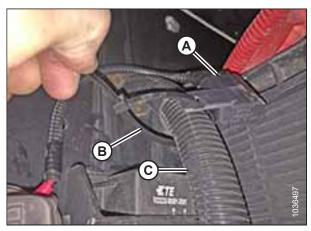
T74 Fuse Holder Secured to Wiring Harness
